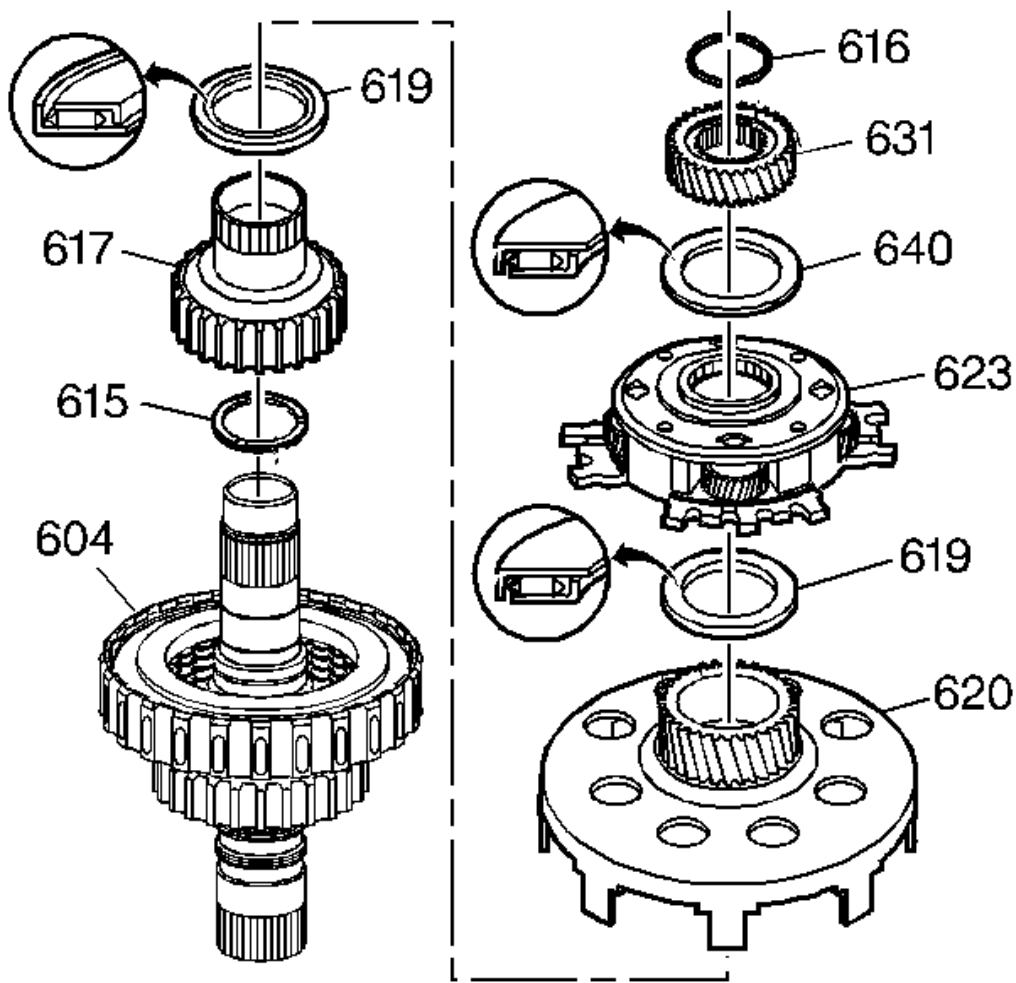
Identifying Reaction Sun Gear And Shell Assembly, Reaction Carrier Assembly, Third Clutch Housing & Input Sun Gear
